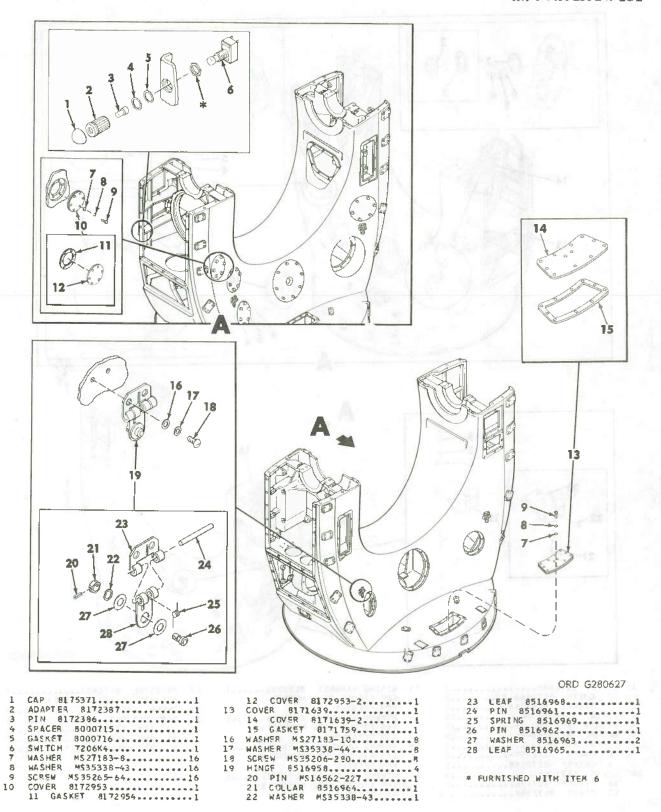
PEDESTAL, ANTENNA /8171625/-PARTIAL EXPLODED VIEW
